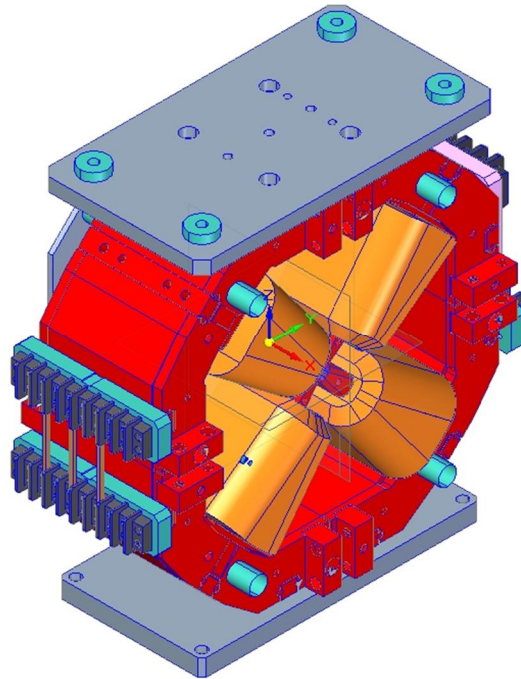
CAD Drawing of 0.433Q3.1 Quadrupole Magnet
